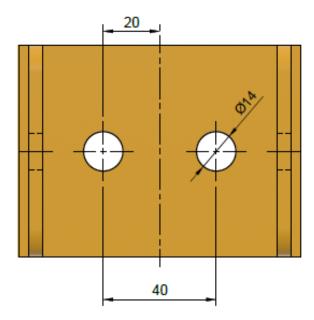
Dimensions of mounting bracket to fix to conveyor cross-member or idler frame (not to weigh frame)
